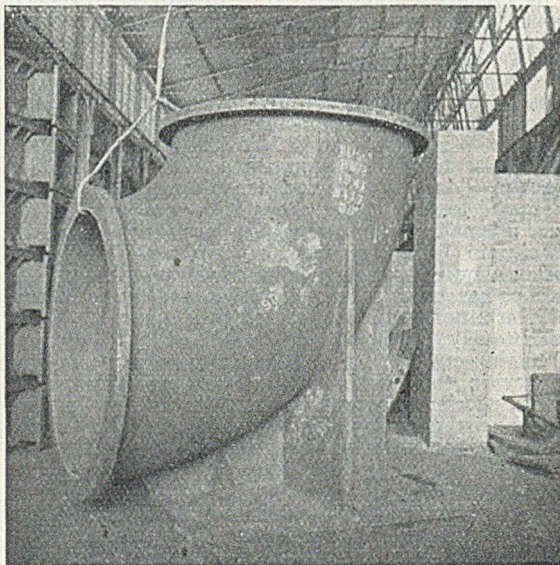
FINISHED 60-IN. DIAM. FOOT BEND PIPE CASTING.
